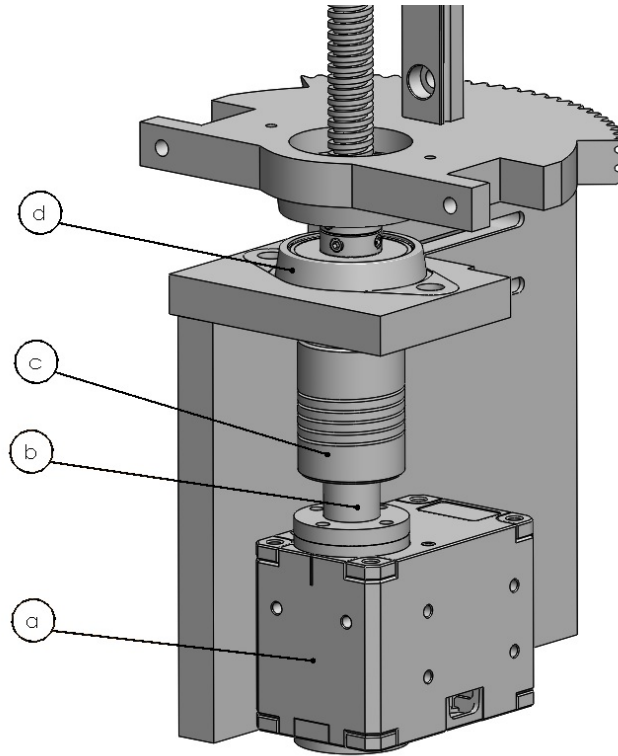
(a) Servo motor 1 for  $\theta$  angle (b) connection part between the motor and coupling (c) spring coupling (d) bearing.
